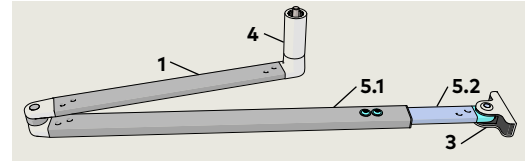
T275 – Splined pull arm assembly, LH, 1 - 2 3/4" reveal
